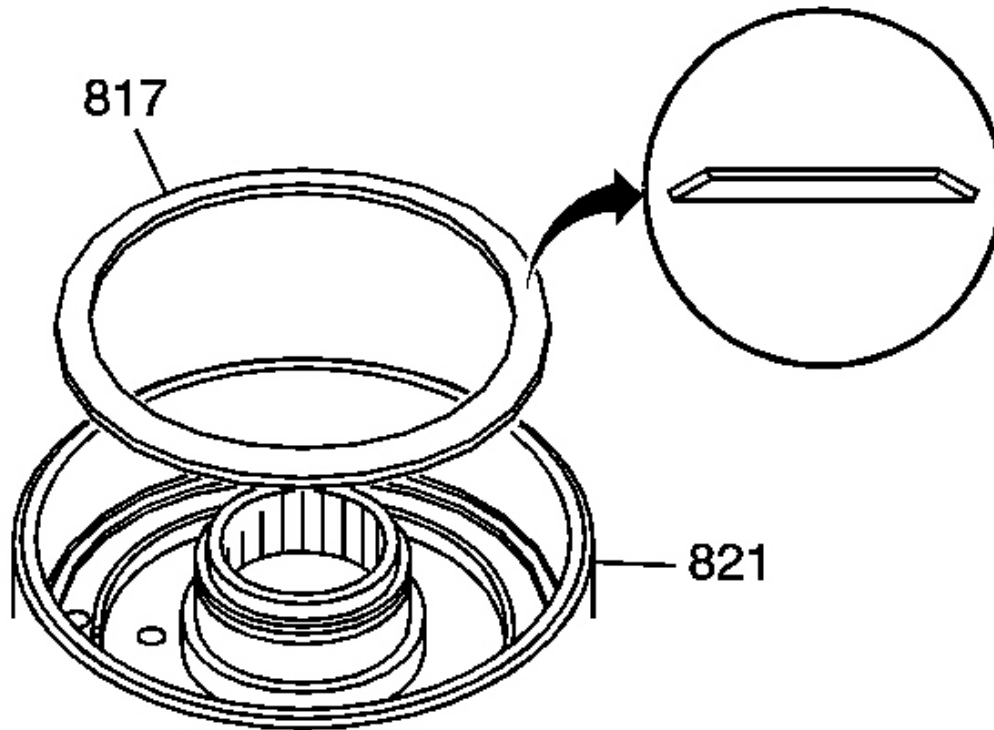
3rd Clutch Housing & 3rd Clutch Piston Spring Plate
